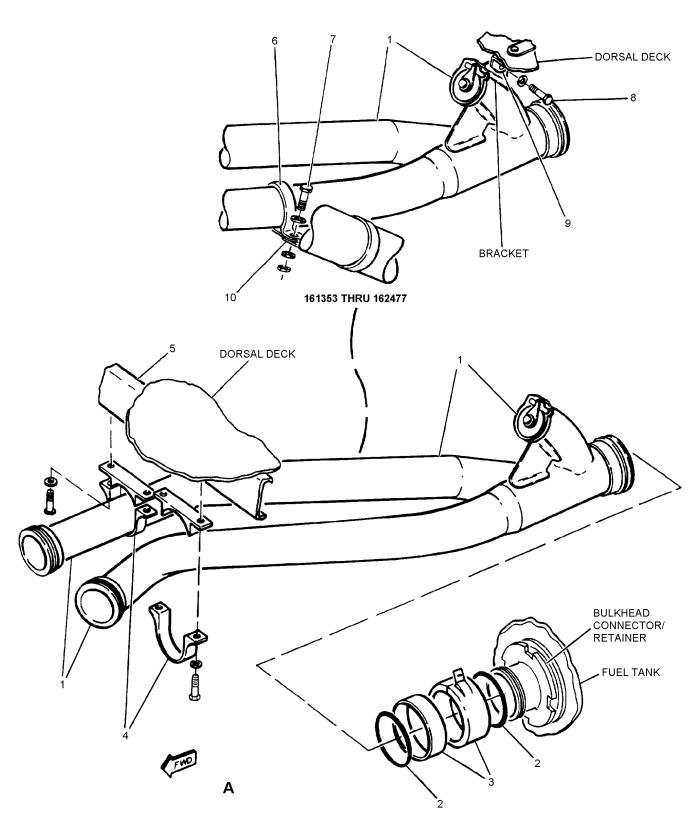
No. 4 Fuel Tank Dive Vent Check Valve (5VAP555) (Sheet 2)
